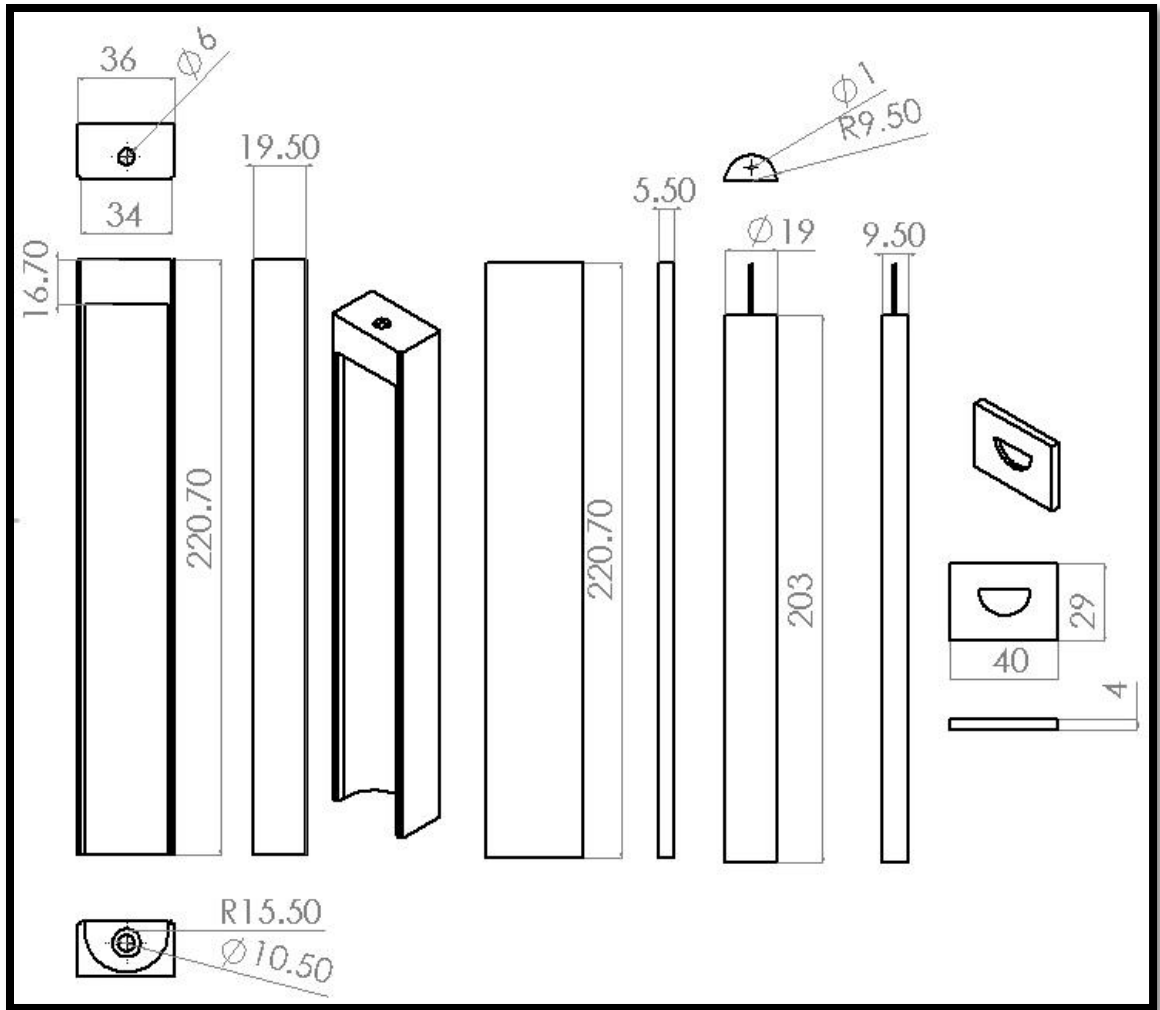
Fiber-Reinforced actuator outer mold design and dimensions.
